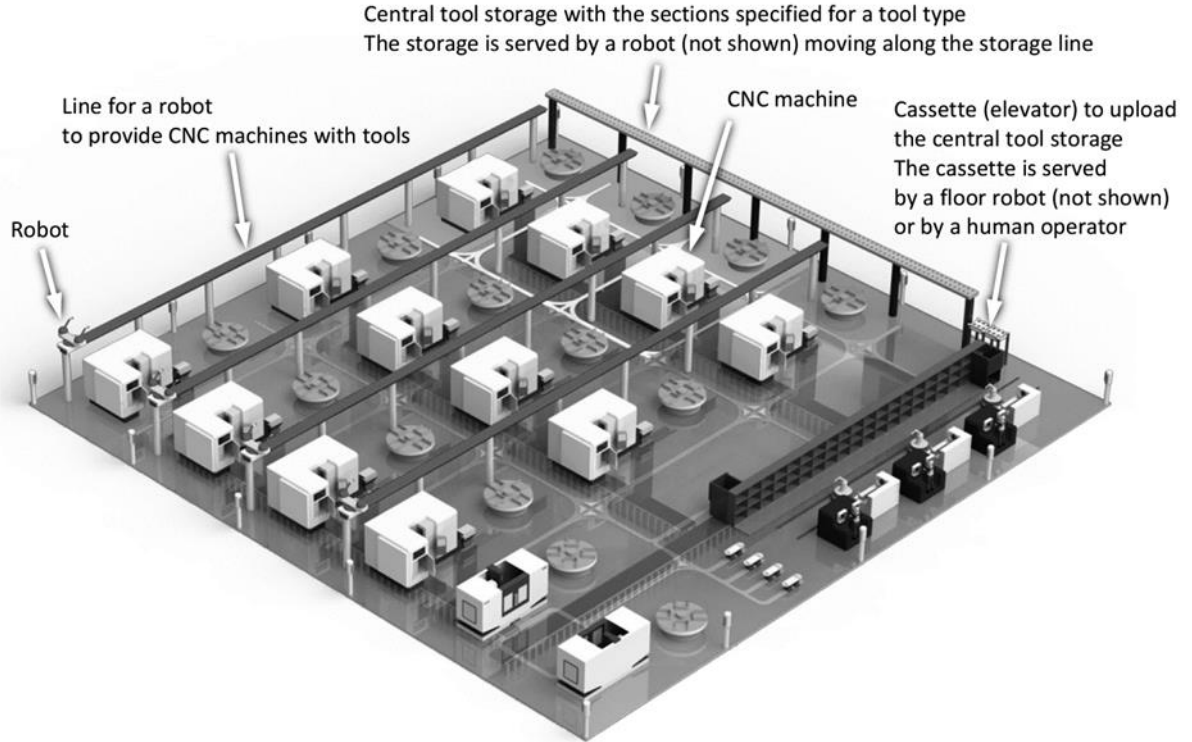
General view of machining flexible manufacturing system (FMS) with the central tool storage and lines for robots to provide CNC machines with tools, which is considered in the paper
